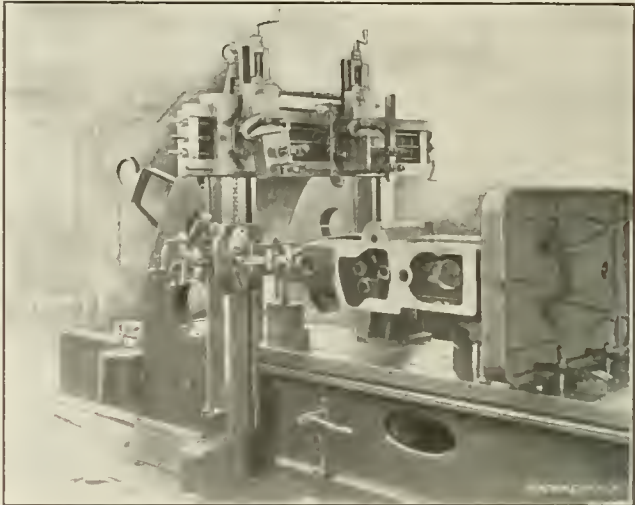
Rough and Finish Planing Back of Column, Door Frame and Vertical Trip Slot
